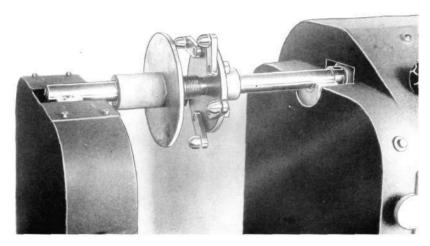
$$x\,6503$$ Shafts and hub for fixing the car wheel
